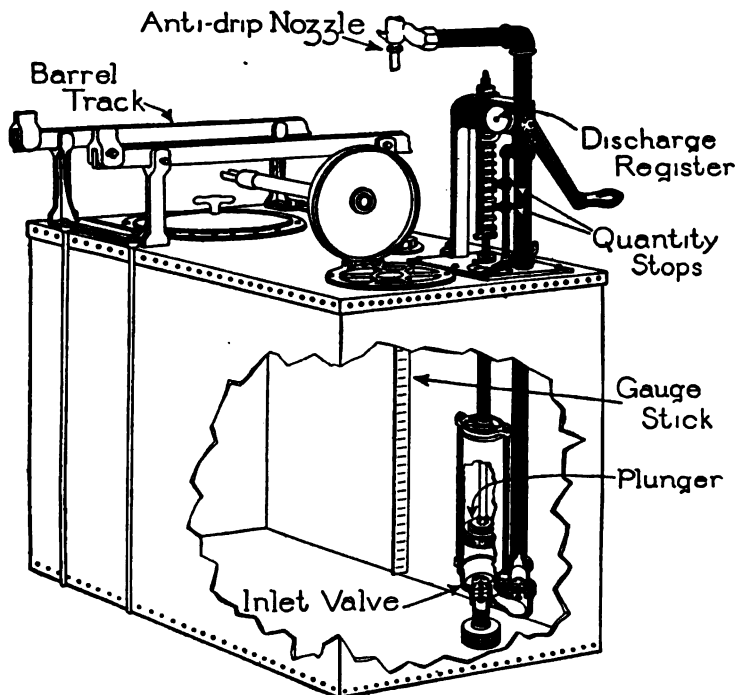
SEC. 9a.—Working features of small storage outfit made by S. P. Bowser & Co.
